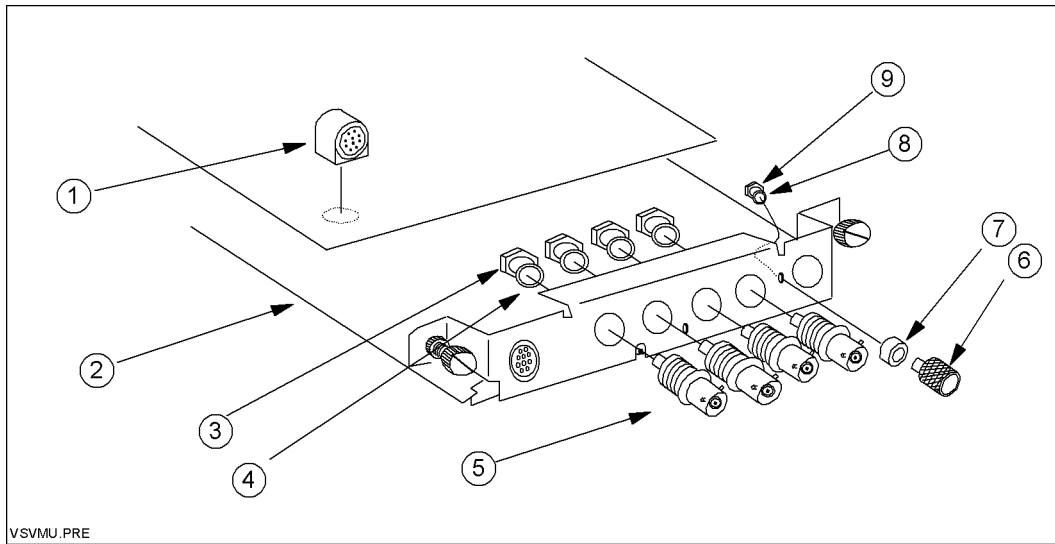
VSU/VMU Module (04155-66545) Parts Location
